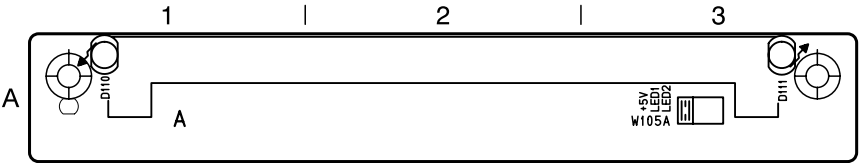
EU56 Front LED PC Broad (Top side)
